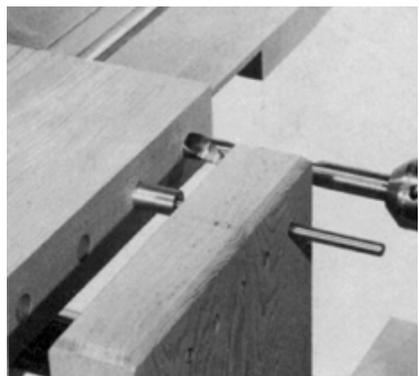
Since the guide pin has a bushing of 3/8" diameter at one end, you can bore either 1/4" or 1/2" holes. You can make an assortment of pins for various hole sizes if you wish.
